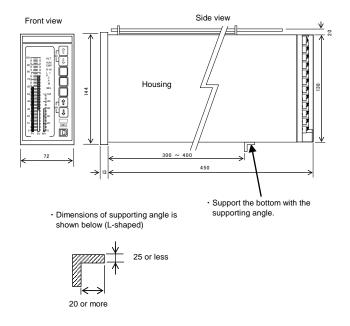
LC531S*S external dimensions and supporting angle dimensions
